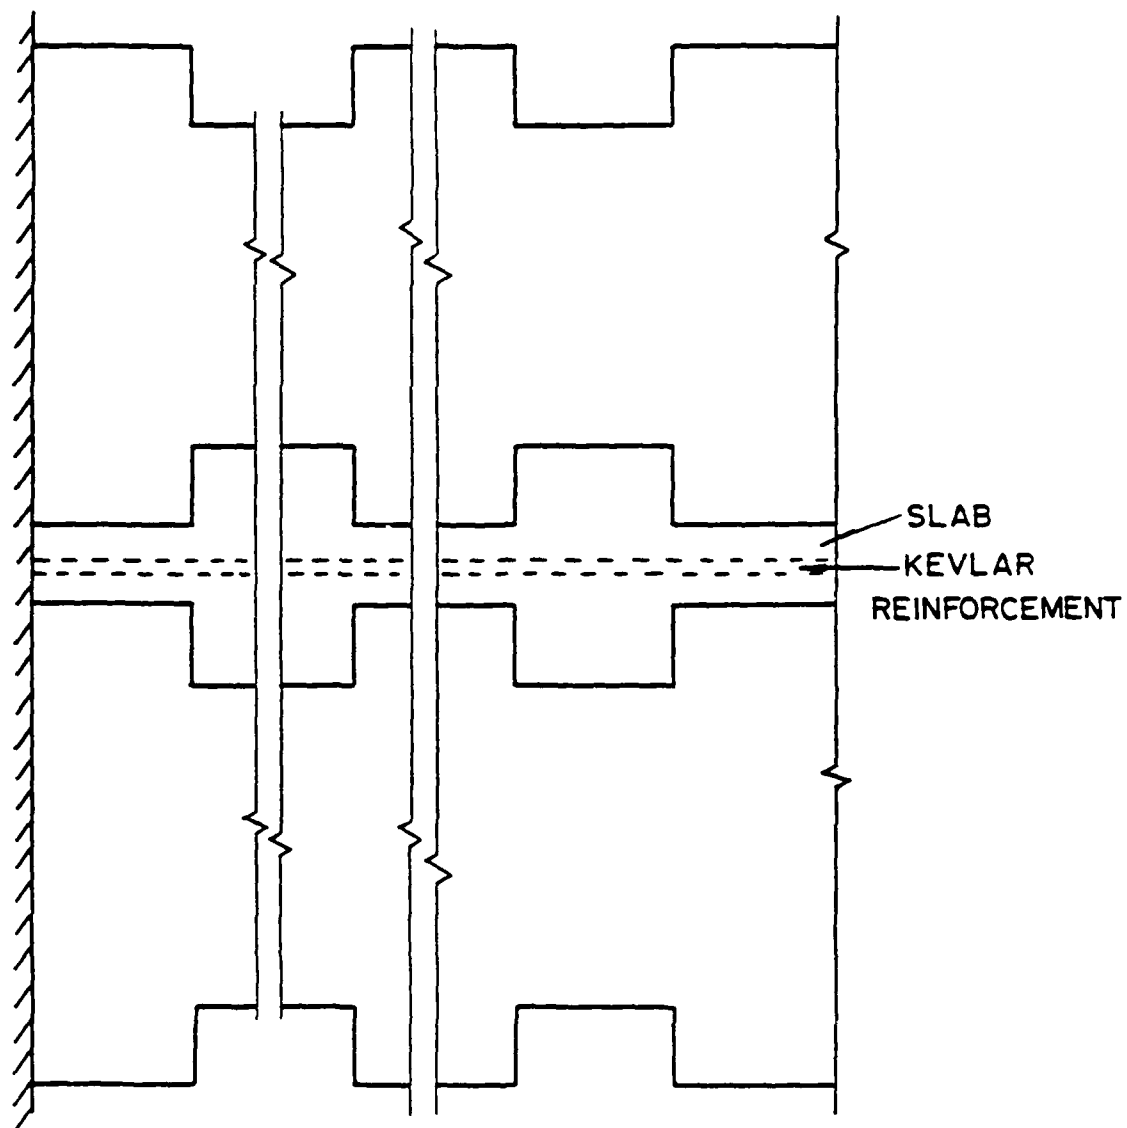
Elevation view of double-sided bellows with kevlar reinforcement, placed back-to-back.
